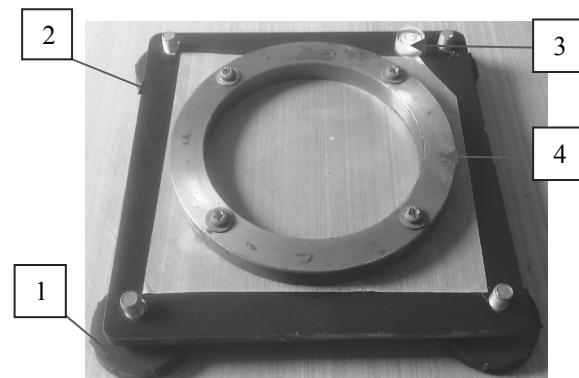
Gravitational casting mould; 1 - mould levelling foot, 2 - bottom plate, 3 - level line, 4 - steel ring
